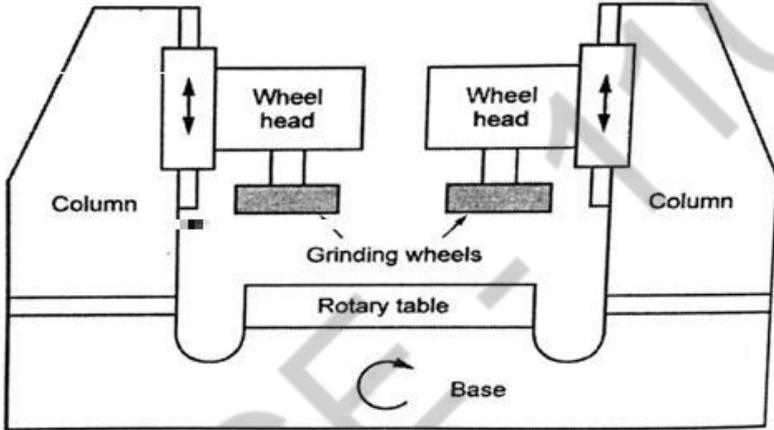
Vertical Spindle Rotary Table Surface Grinder
